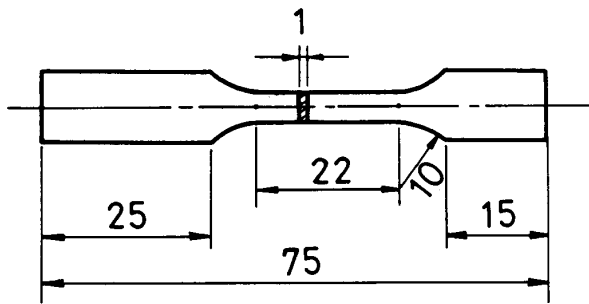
Dimensions of specimens for stress corrosion cracking tests in millimeters
